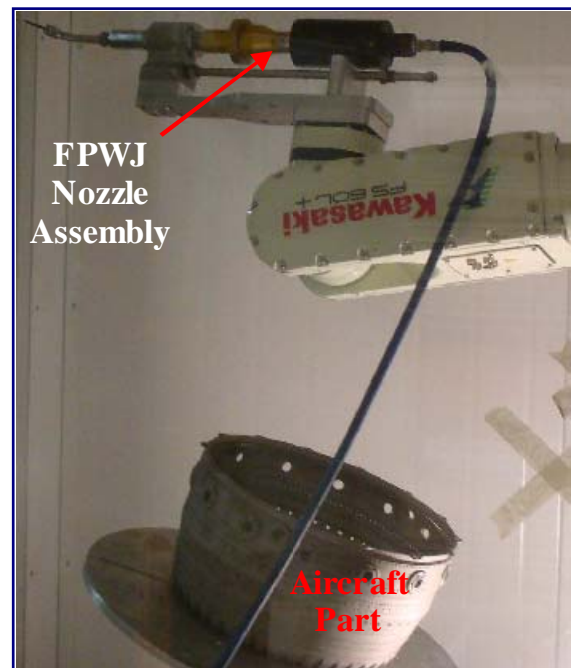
FPWJ nozzle assembly mounted on the robotic arm.
